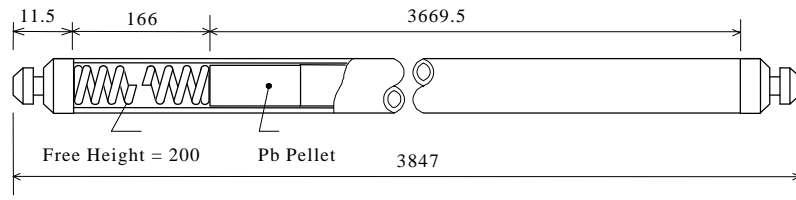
Dimensions of the dummy fuel rod (unit: mm)
